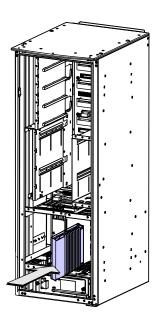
Removing VXxx unit cover and installing VXxx unit in Mini Outdoor cabinet
